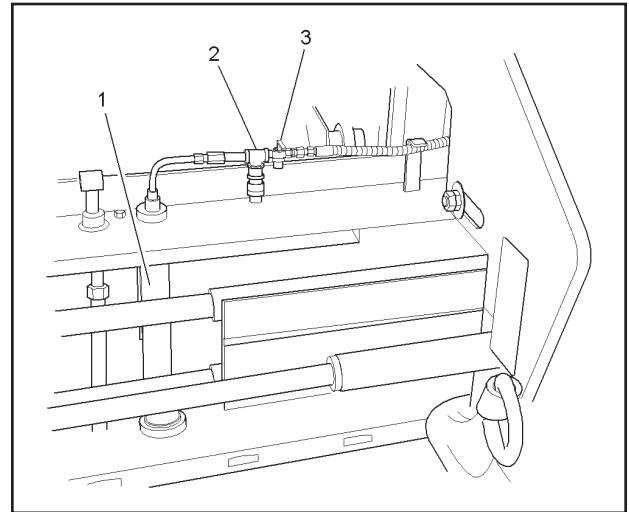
EXTENSION BURNER QUICK COUPLING CONNECTOR
